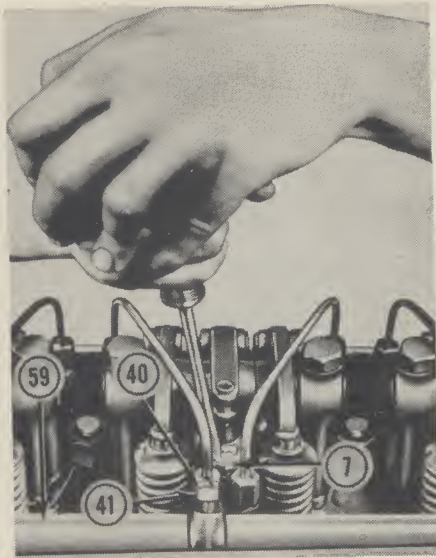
A—To locate a misfiring cylinder, make the injector inoperative by holding down the injector follower guide (7) with a screw driver.
